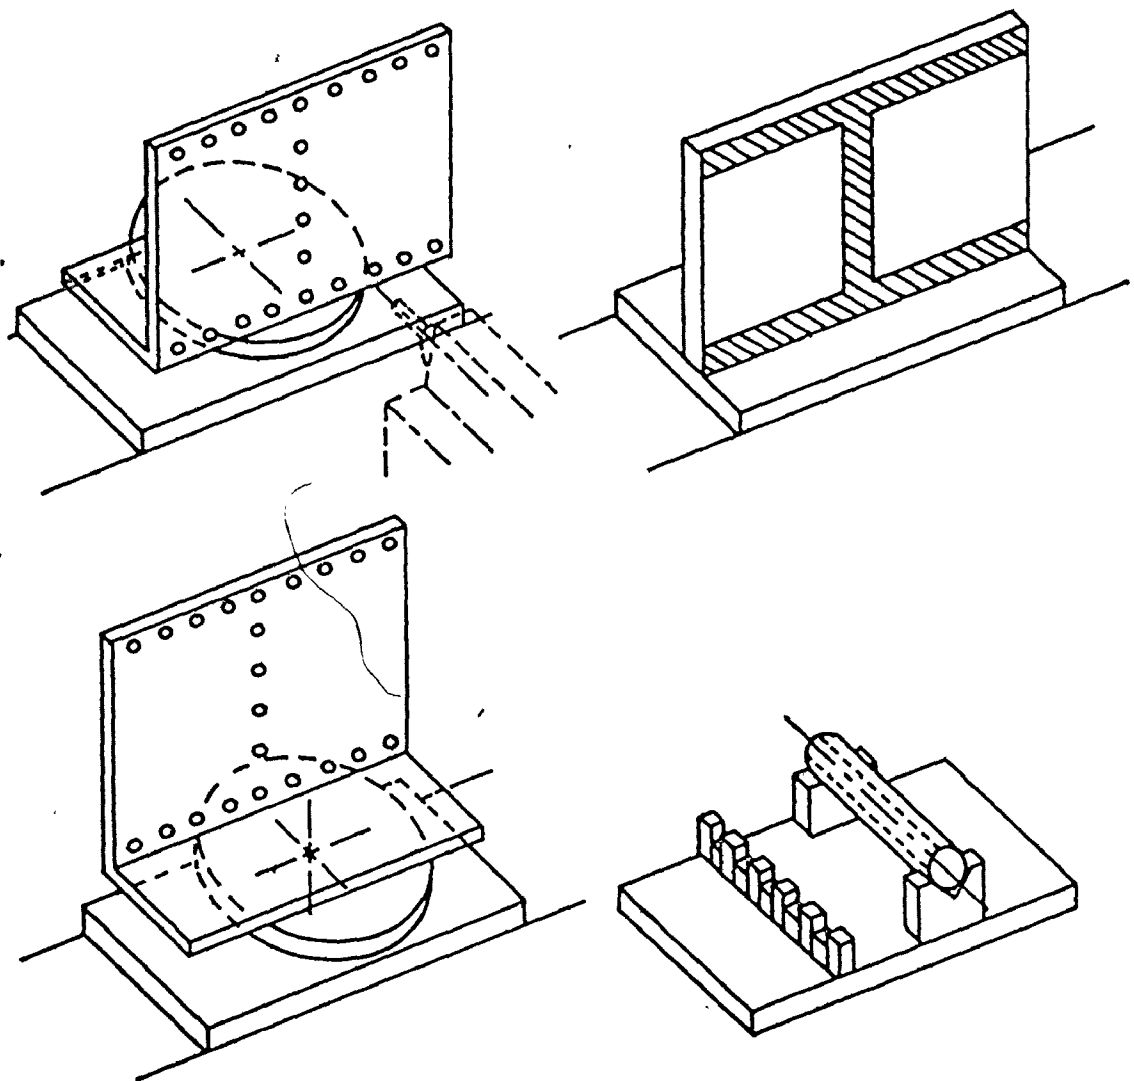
Design of a Master Part for a Type of Machining Center.
